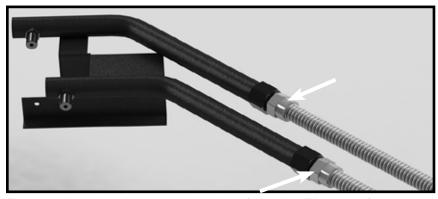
Attach main gas supply tubes from the "T" to manifolds.
